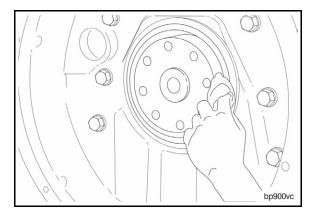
CLEAN AND DRY THE SEALING SURFACE
